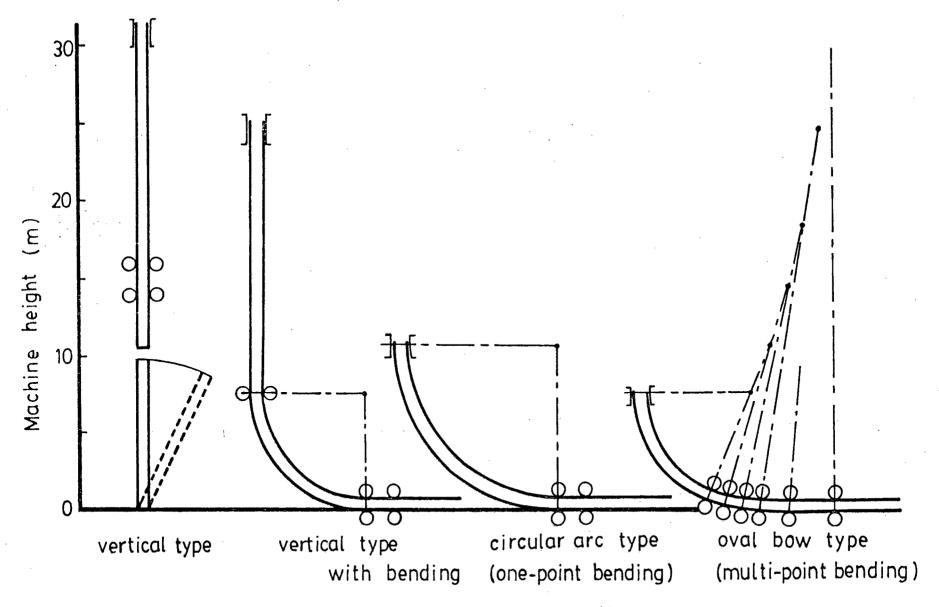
Schematic drawing of Different Types of Casting Machines  $^{40}$ .
